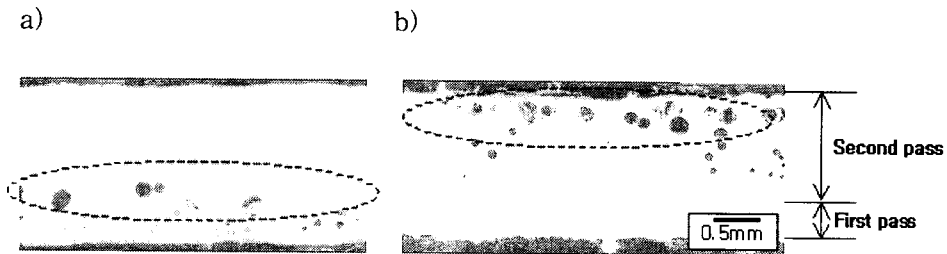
Inner cavities in longitudinal section of weld a) 1350W, 1m/min partial penetration b) 1650W 1.2m/min full penetration
